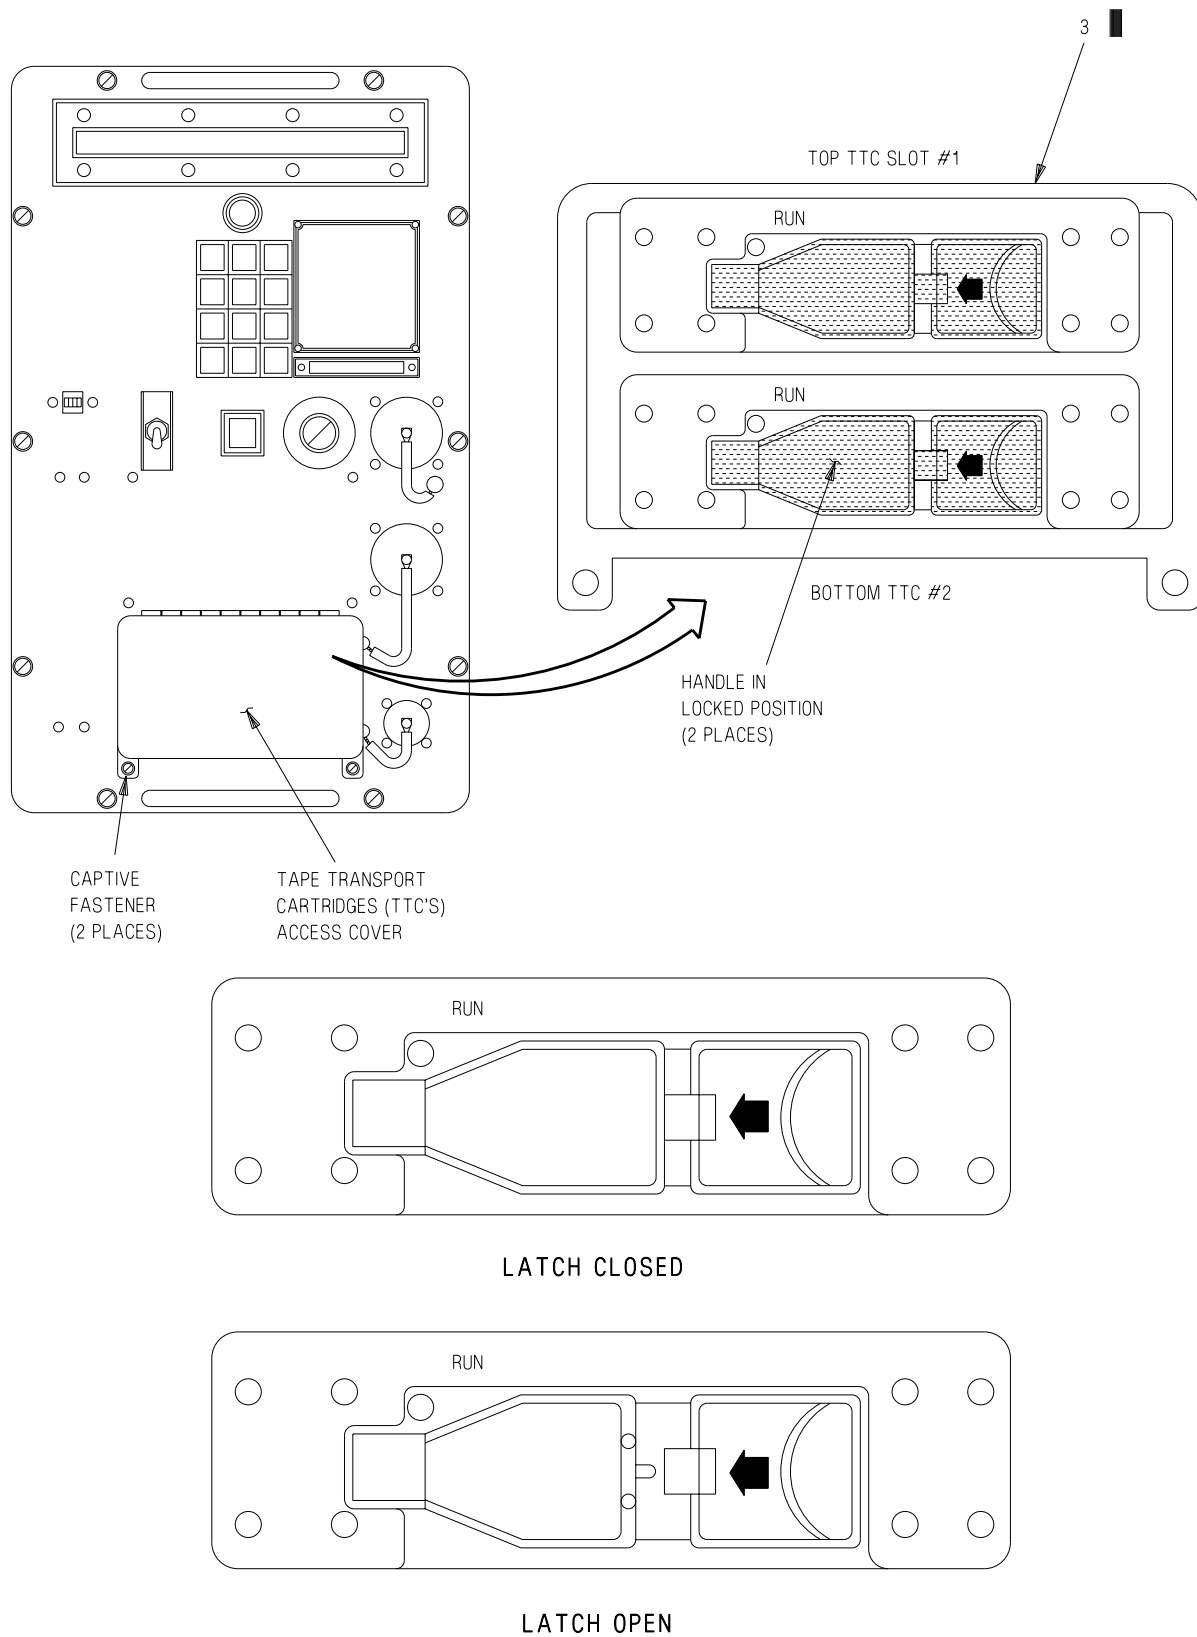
Test Equipment Hookup Locator (Sheet 3)
